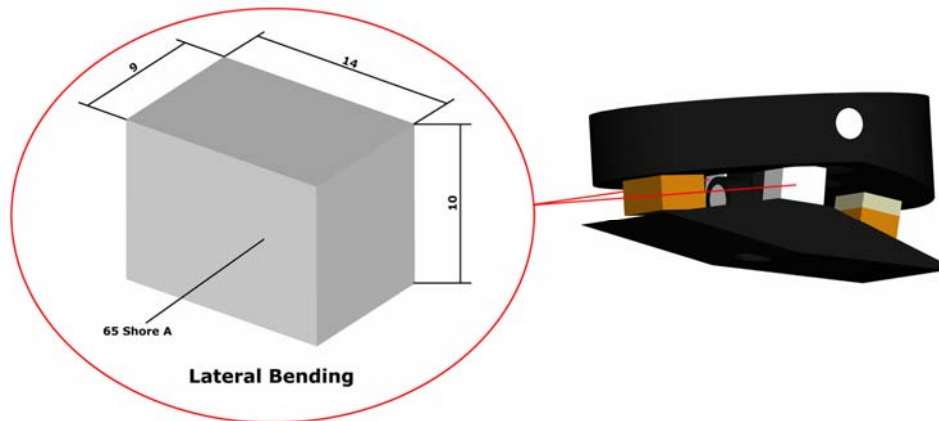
Rubber pieces placed between the modified load cell and C1
